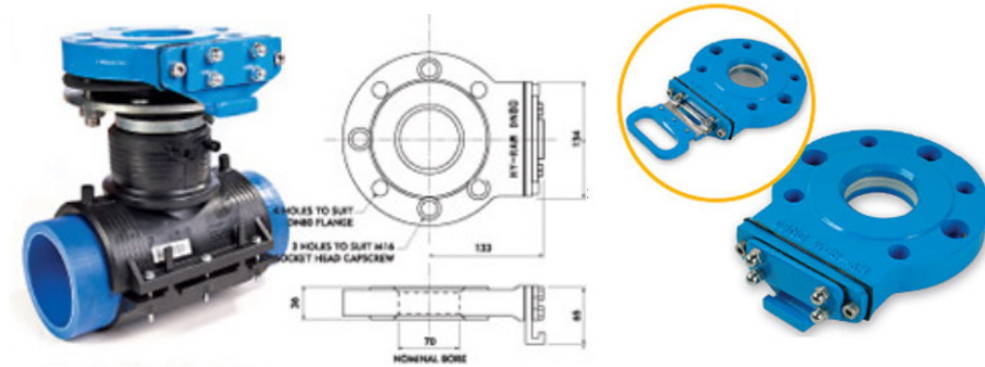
Flange closure mounted on saddle (<http://www.imbemadenso.nl/>).
